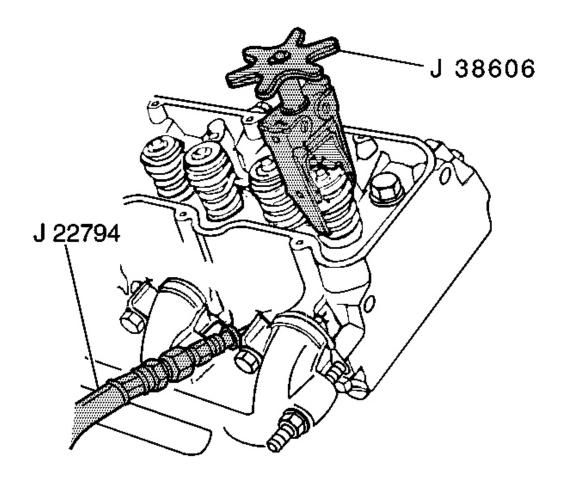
Compressing Valve Spring (Cylinder Head Installed) Using Special Tools Courtesy of GENERAL MOTORS CORP.
